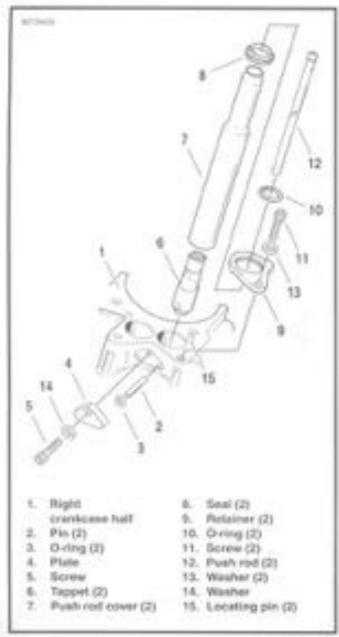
Middle Valve Train Components (Quantities per Engine Cylinder)
